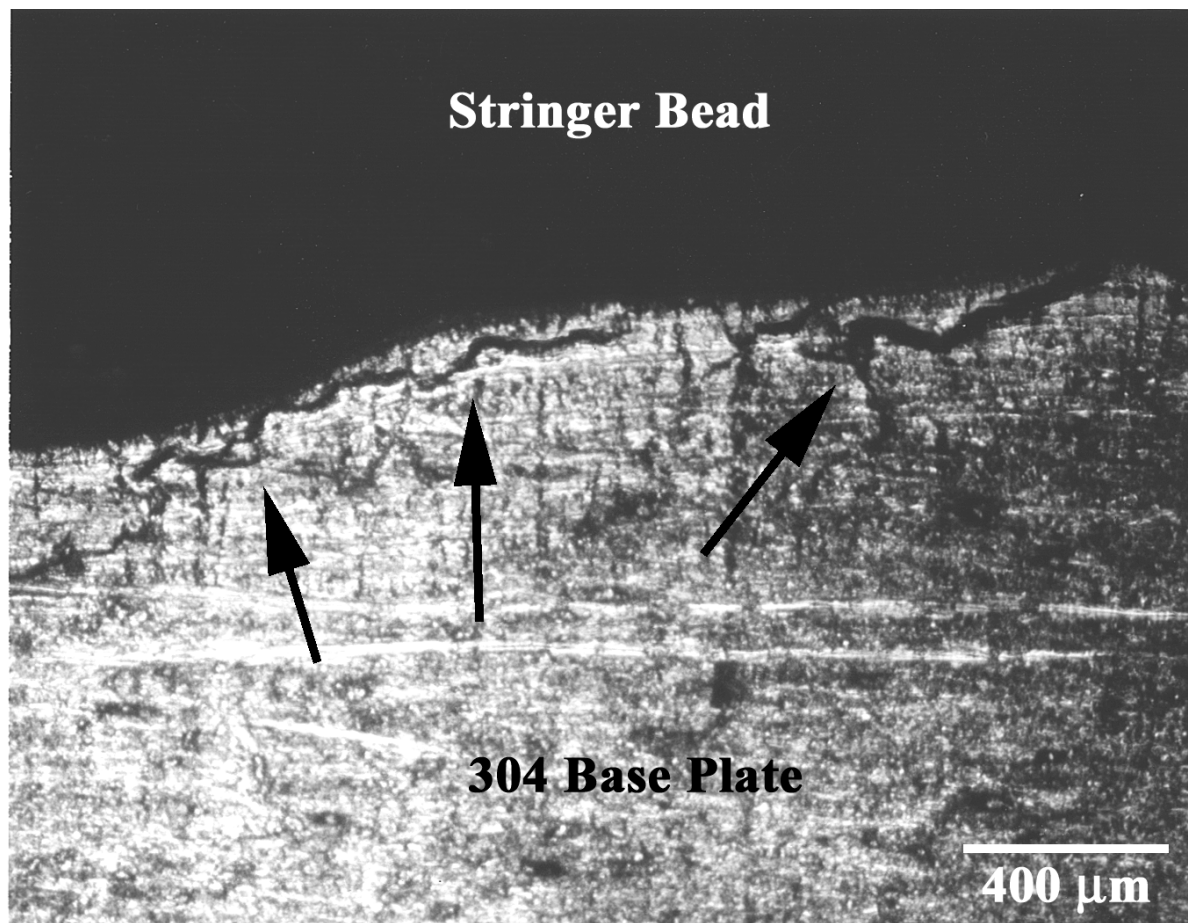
Toe cracking in HAZ of "hottest" stringer bead on 304 base plate.
